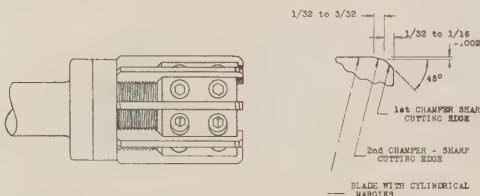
SECOND BEVEL ON POINT OR CUTTING EDGES OF ADJUSTABLE-BLADE REAMERS
